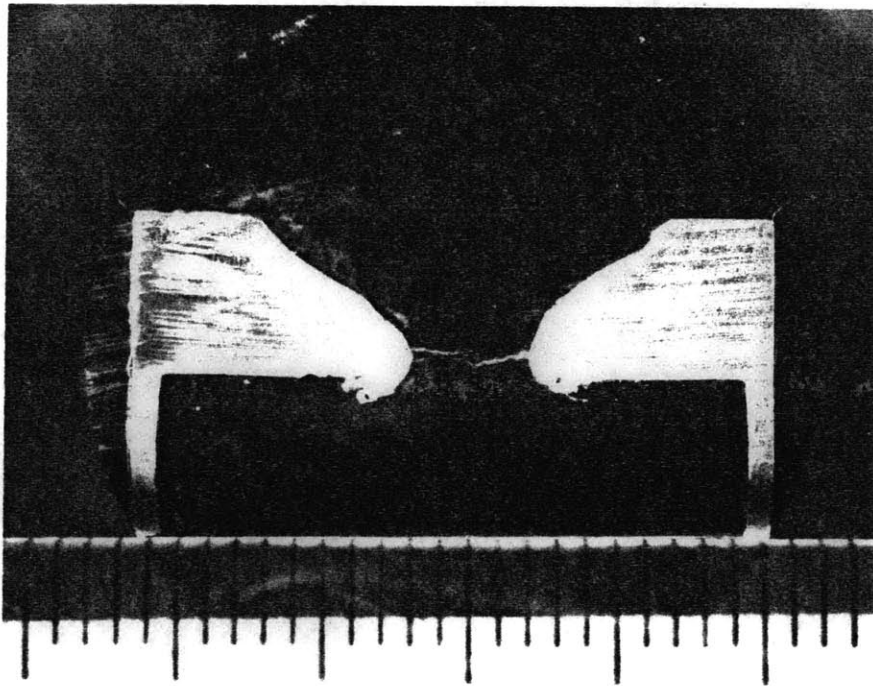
b: Full penetration for workpiece $7/8" \times 7/32"$
